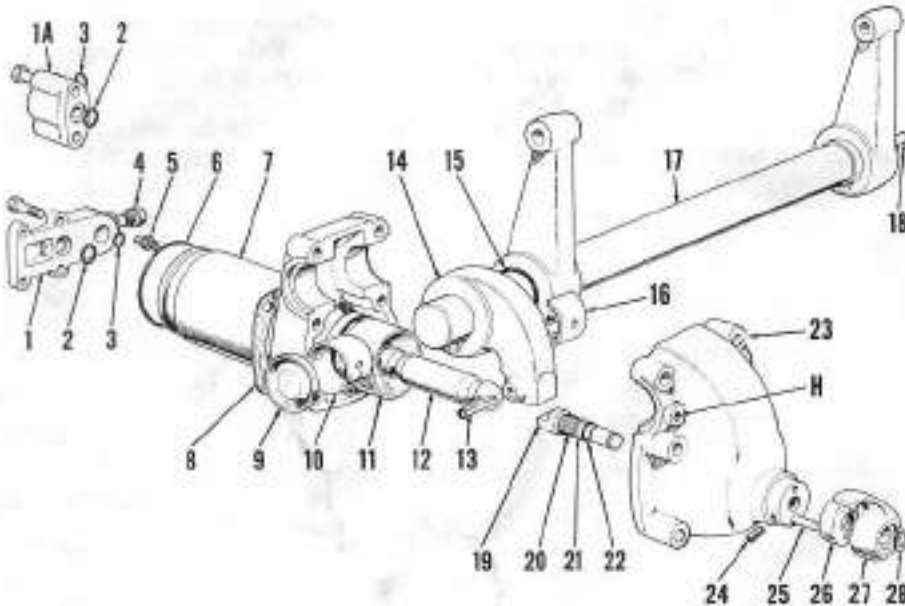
Exploded view of typical rockshaft cylinder and rockshaft assembly. Refer to Fig. 308 for cross-sectional view of rockshaft latch assembly. No attempt should be made to remove or reposition the rockshaft lift arms. Rockshaft ram cylinder arm (14) is renewable by splitting old arm, then pressing arm from shaft. Heat new arm to expand it, press into position and allow to shrink fit to shaft.
